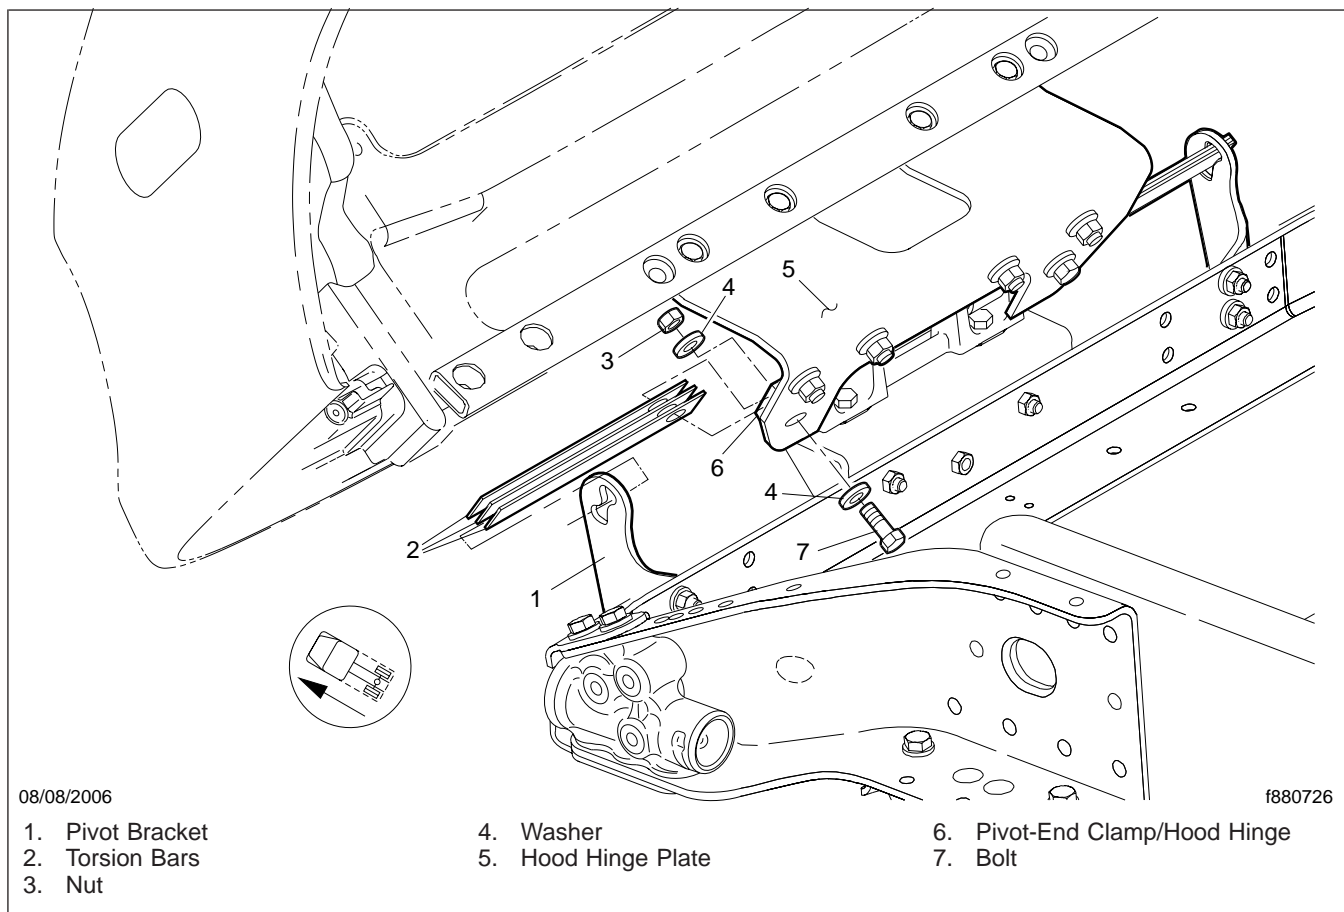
, Hood Tilt-Assist Assembly (vehicles with EPA07 compliant engines)
